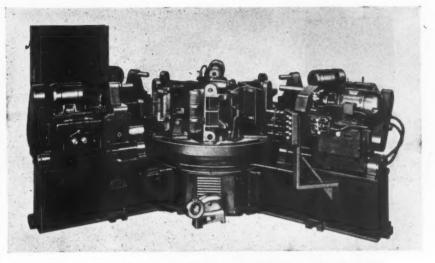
Special Machine Designed for Machining Steering-gear Housings by the Snyder Tool & Engineering Co.
